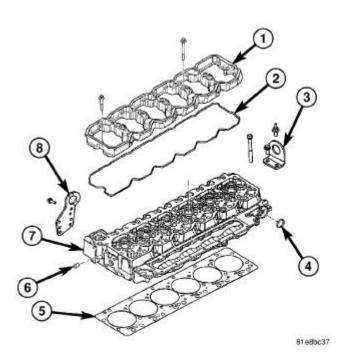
Cylinder Head Assembly & Gasket Courtesy of CHRYSLER GROUP, LLC
